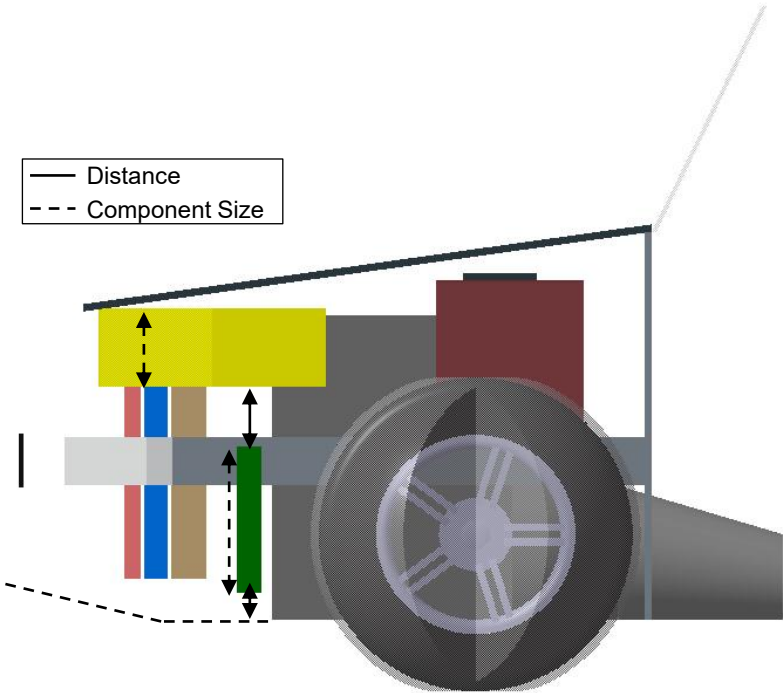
Dimensional chain over the lateral intercooler and headlight in the z-direction
